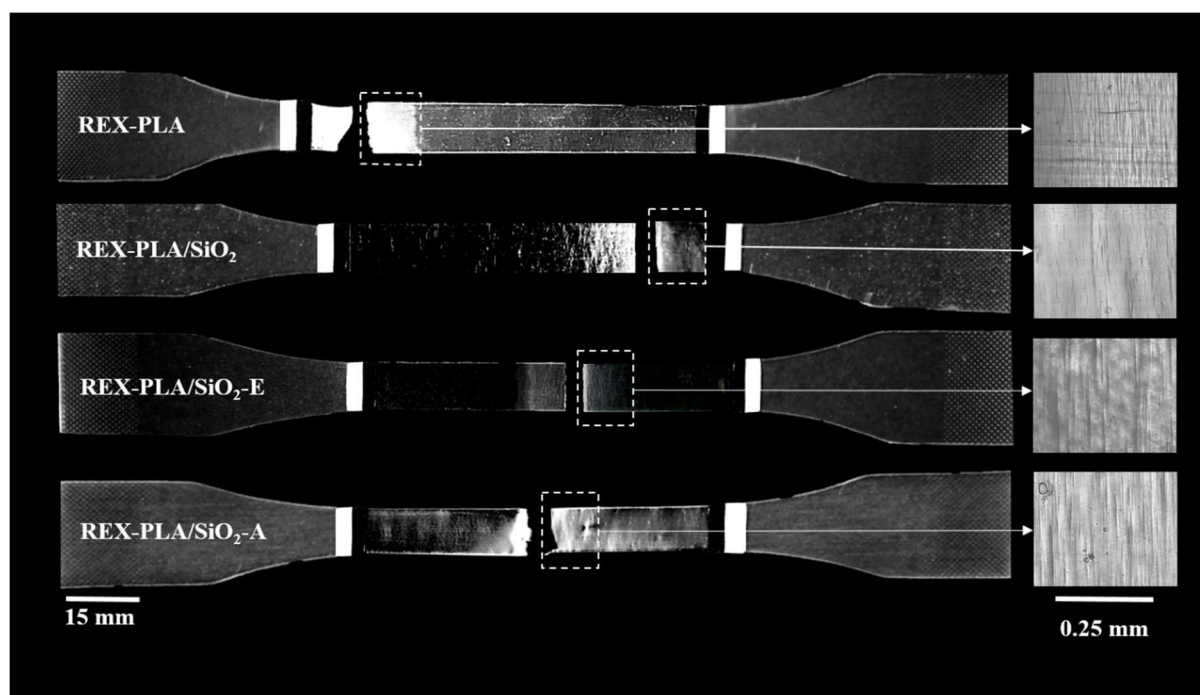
Light macrophotographs of PLA and REX-PLA/nano-SiO₂ composites specimens post-testing at 10 mm.min⁻¹. Micrographs taken were from the fractured part of each sample.
